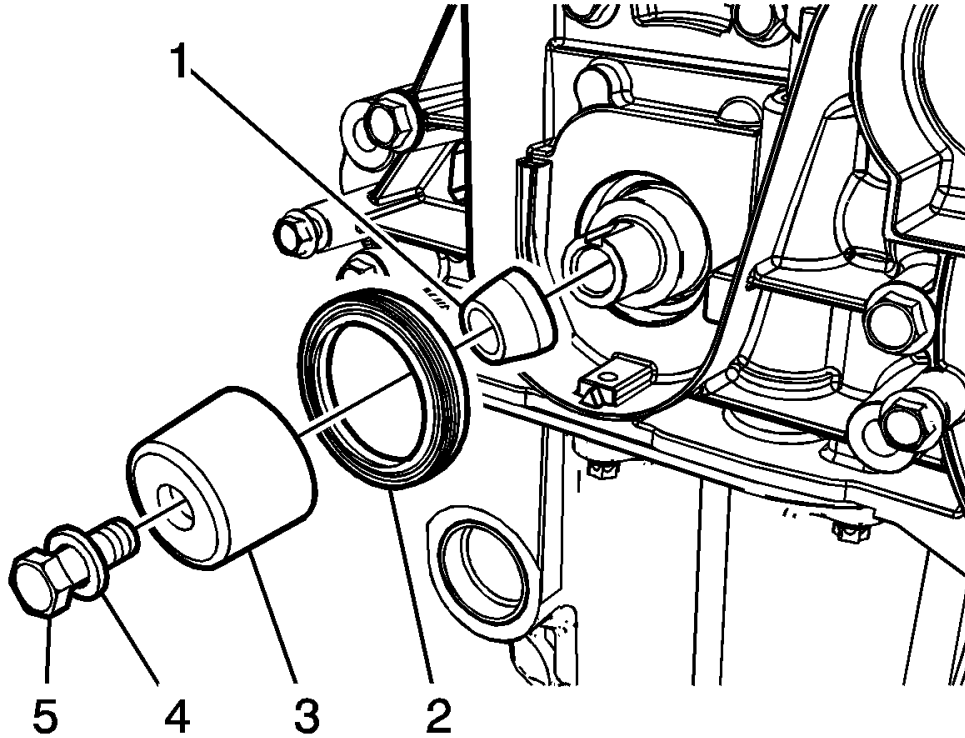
Installing Crankshaft Front Oil Seal Ring
